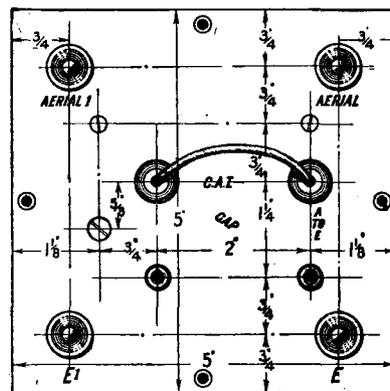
The drilling is carried out as shown. Panel transfers may be used as the lettering indicates.
